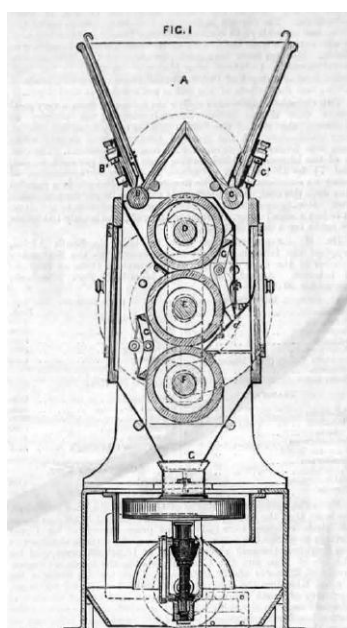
Milling Machinery at the Paris Exhibition⁷⁶
